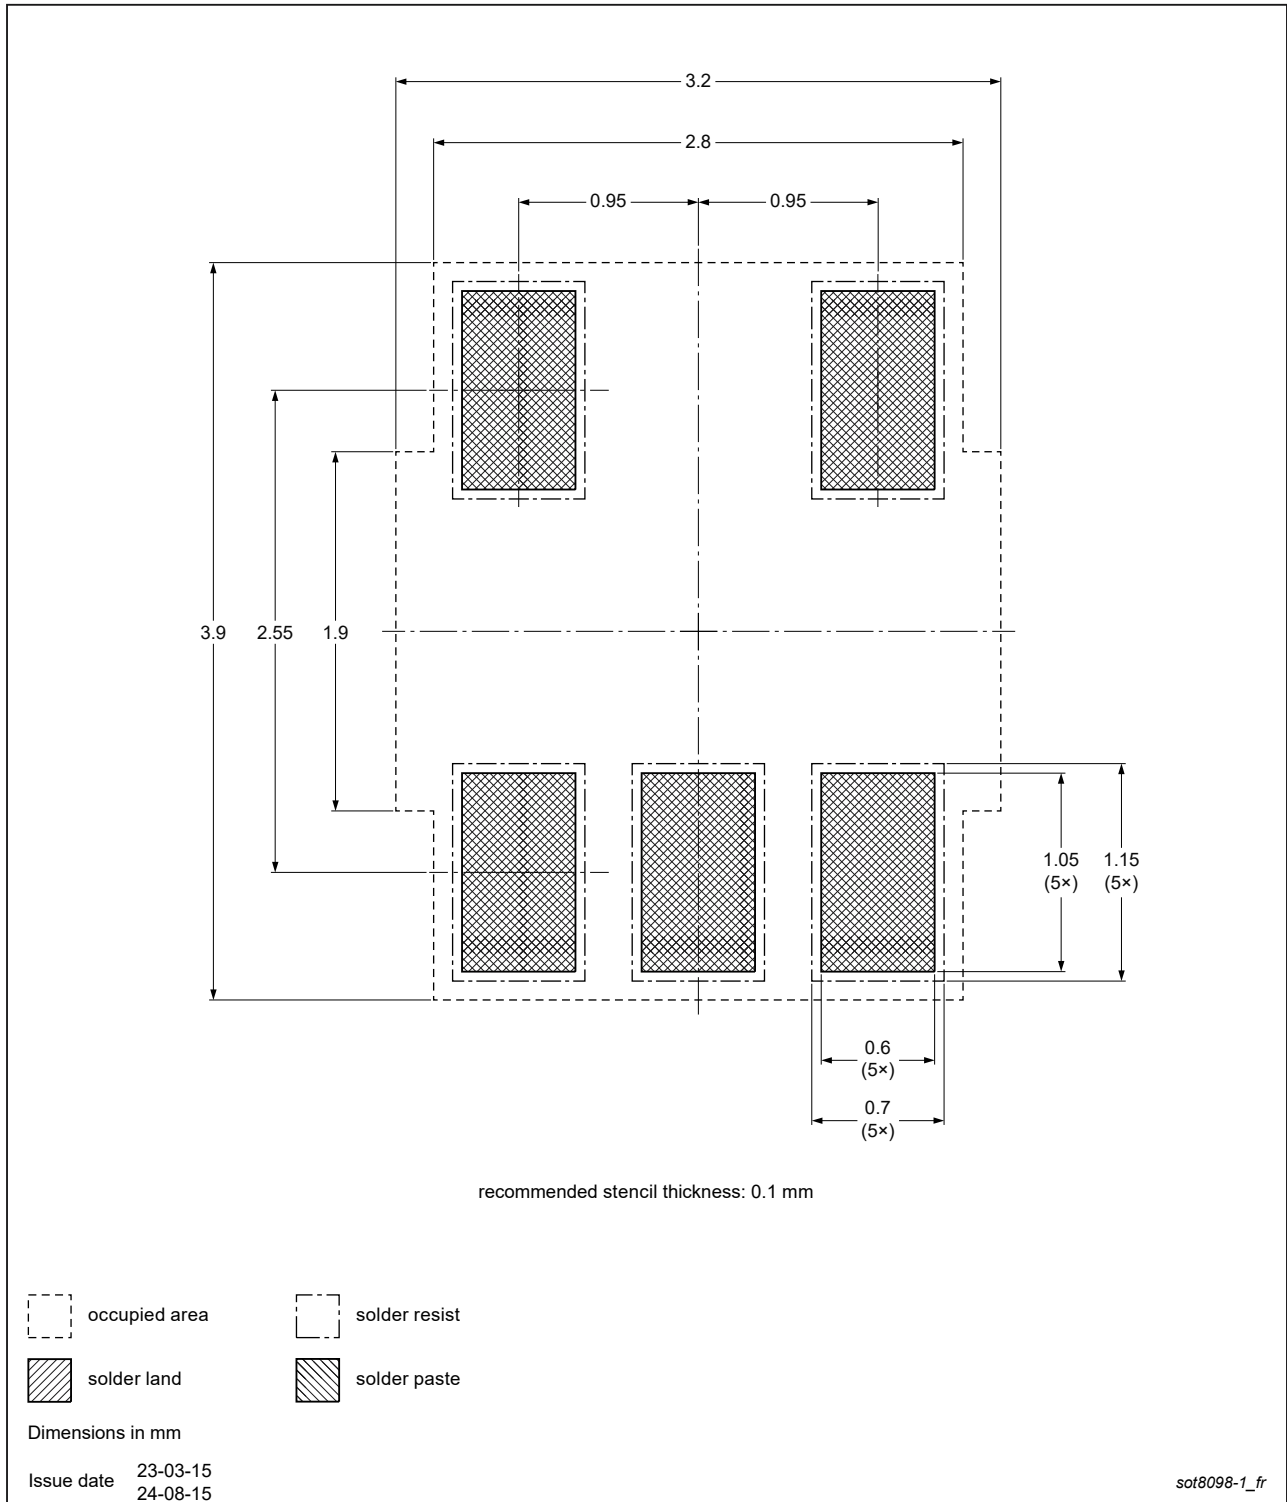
Reflow soldering footprint SOT8098-1 (TSOT23-5)
